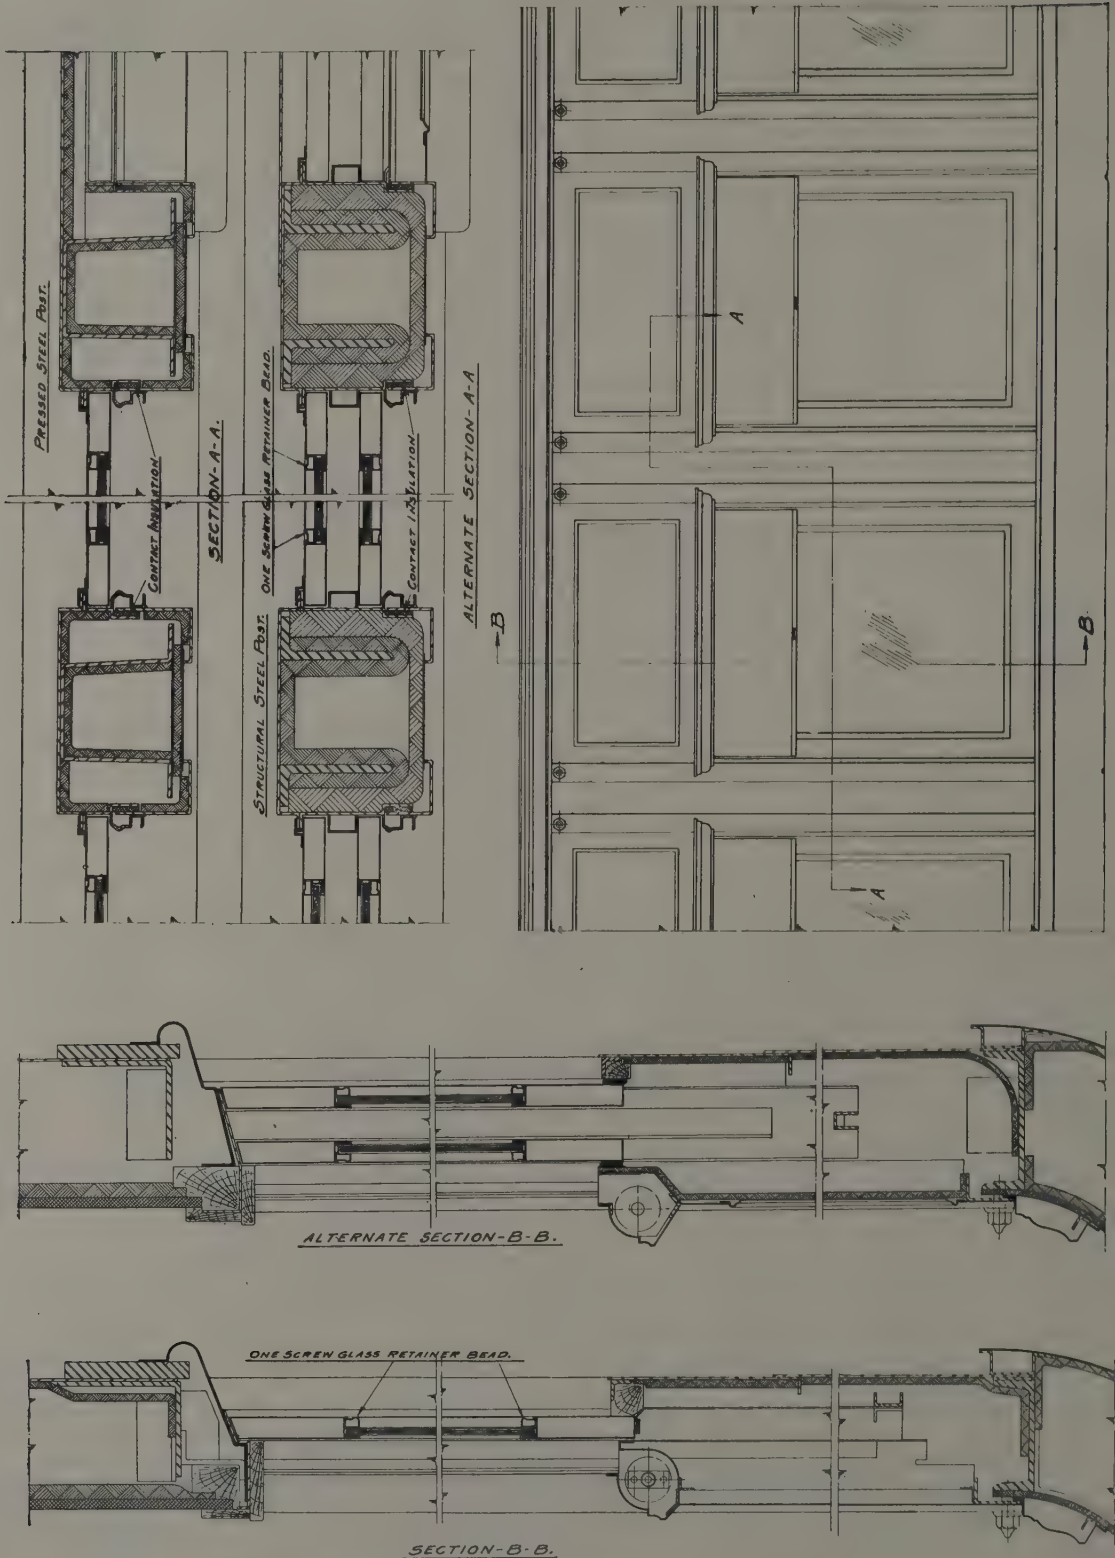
Integral Window Frames for Steel Passenger Equipment. The Hale & Kil burn Company.
